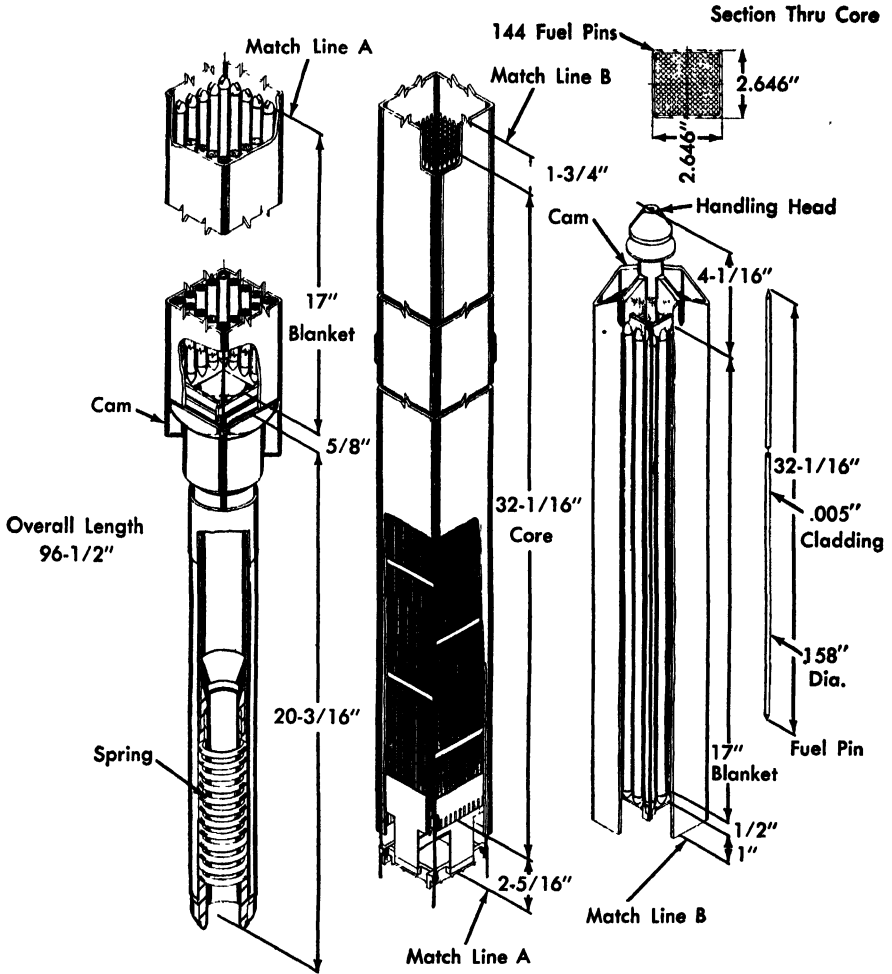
Cutaway drawing of the Enrico Fermi Reactor core assembly.
